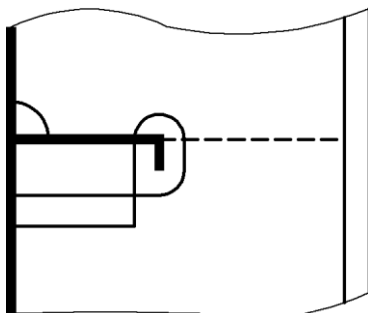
End connection of ordinary stiffener: One large collar plate
